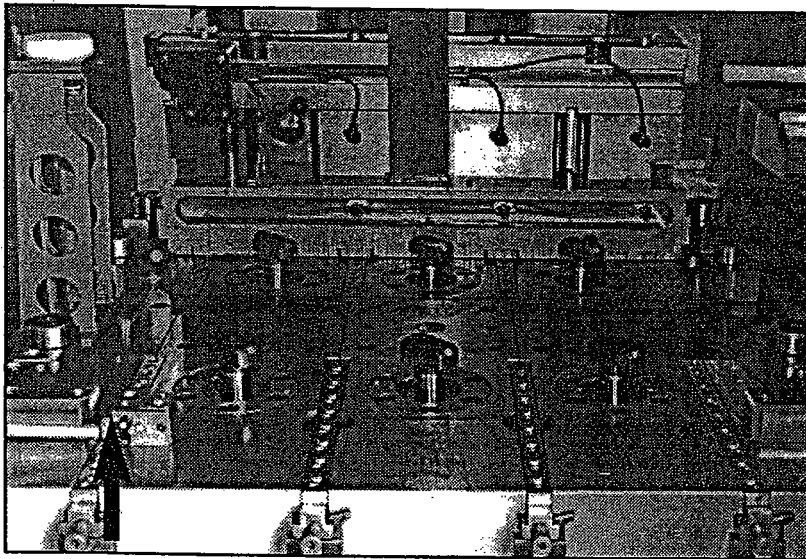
Tool-in position proximity switch provides press control feedback on this press. Swing sink clamps mounted in the bolster use dual check valve blocks in the bed clamp circuit.
